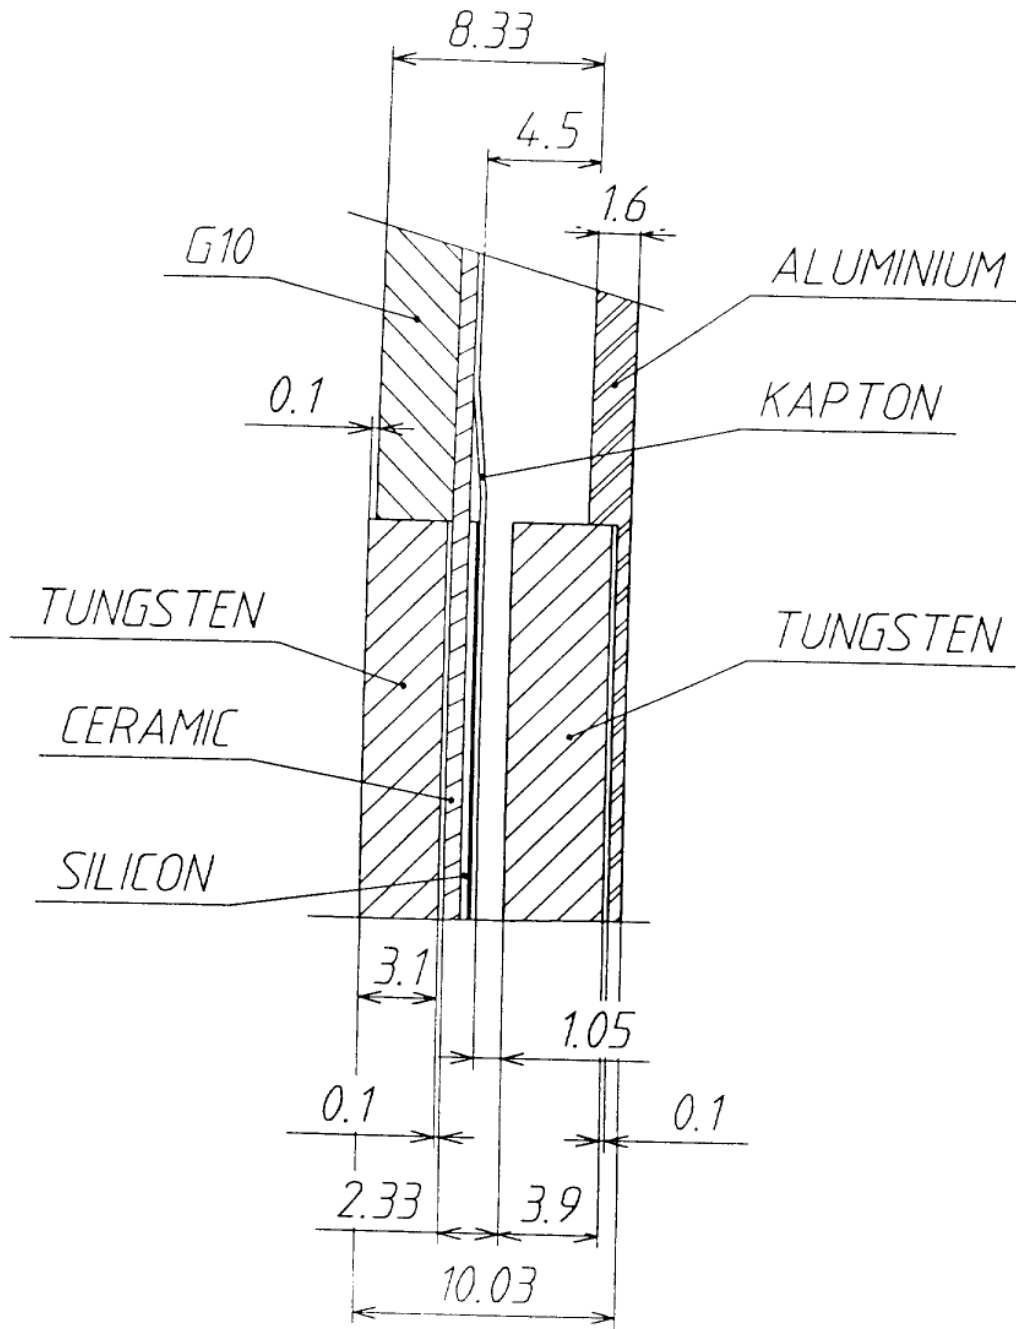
Detail section view of a minimodule composed of two W plates sandwiching a "G-10" layer which supports the silicon detectors (dimensions in mm).
